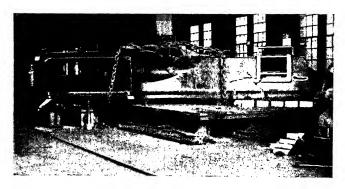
Fractured hoisting engine bed prepared for bronzewelding. Observe the use of jacks for lining up the parts.
